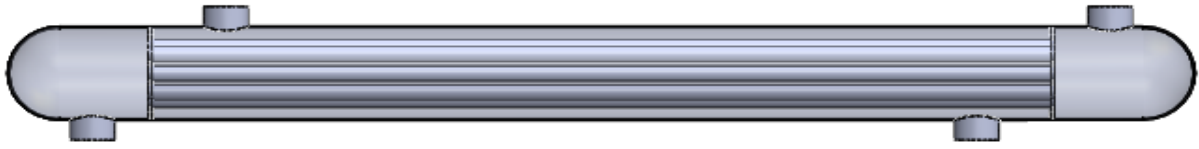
Shell and Tube type Heat Exchanger _ existing type
